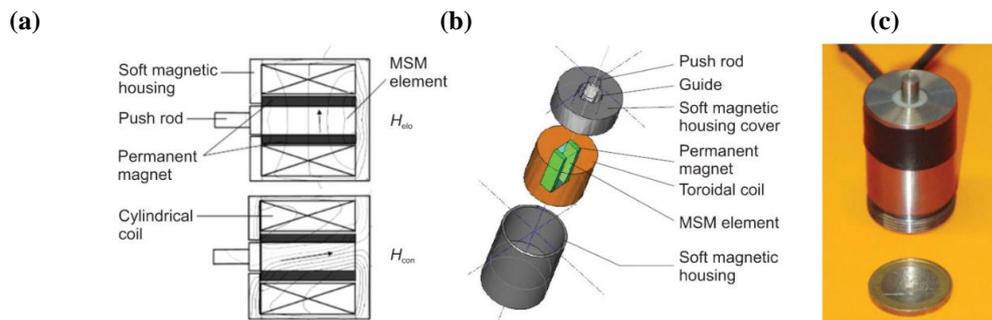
Principle of operation, (a) schematic diagram, (b) exploded assembly drawing, (c) realized prototype of the push-pull actuator.
